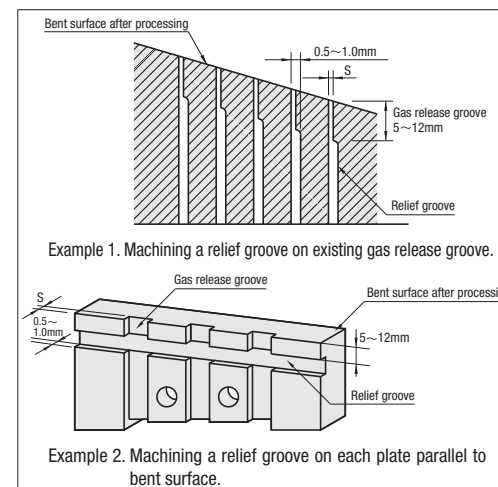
Cavity Inserts for Gas Release Example of relief groove addition
